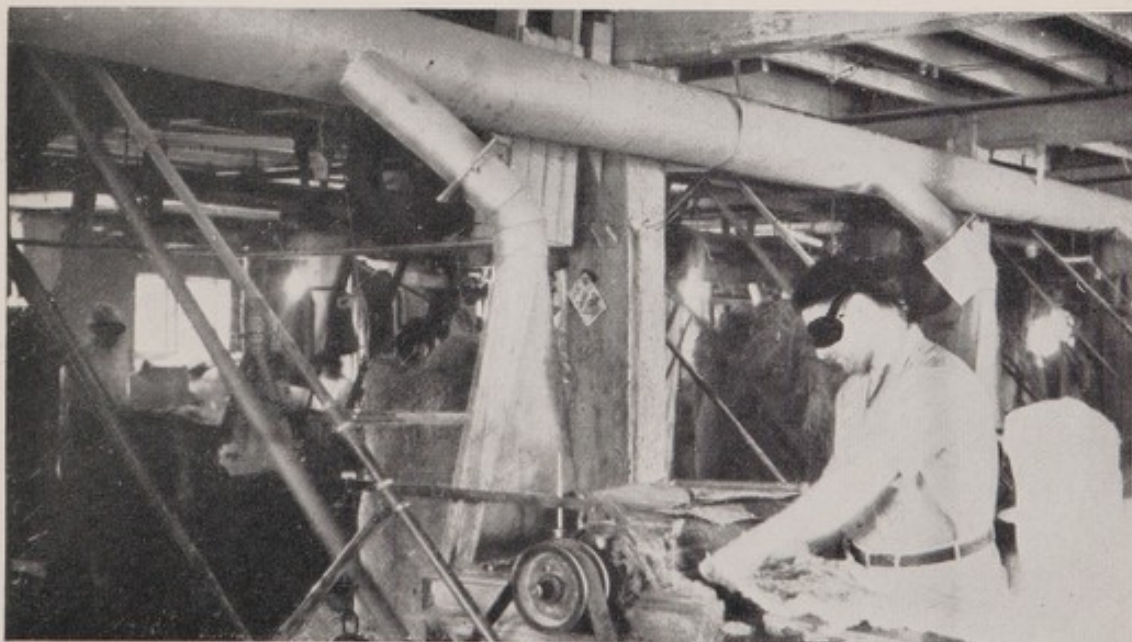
CUTTER FEEDING BRUSHED CARROTED FUR INTO CUTTER.
